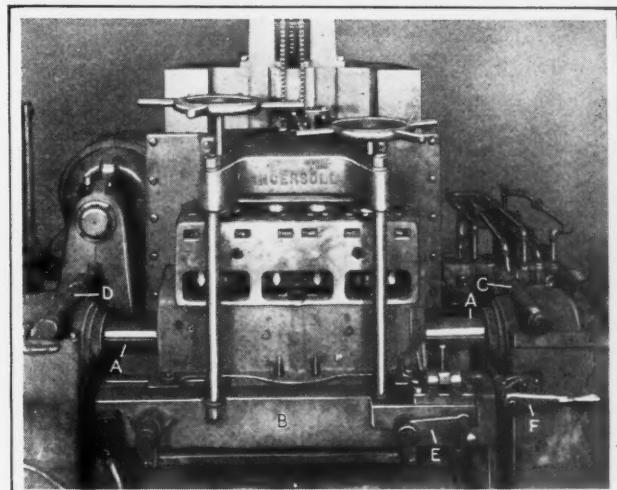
Facing Main Bearings and Cutting an Oil-groove
